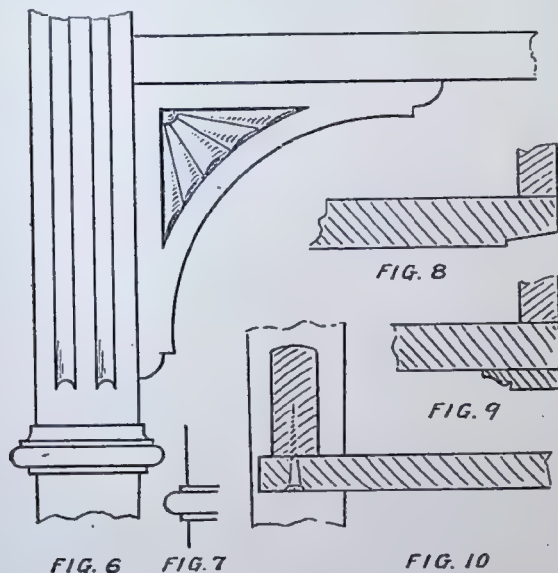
DETAIL OF PILASTER, LOWER BRACKET AND NECKING. FIG. 7.—LOWER NECKING. FIGS. 8 AND 9.—SECTIONS FOR DRAWERS. FIG. 10.—SECTION OF SHELF AND RAIL.
